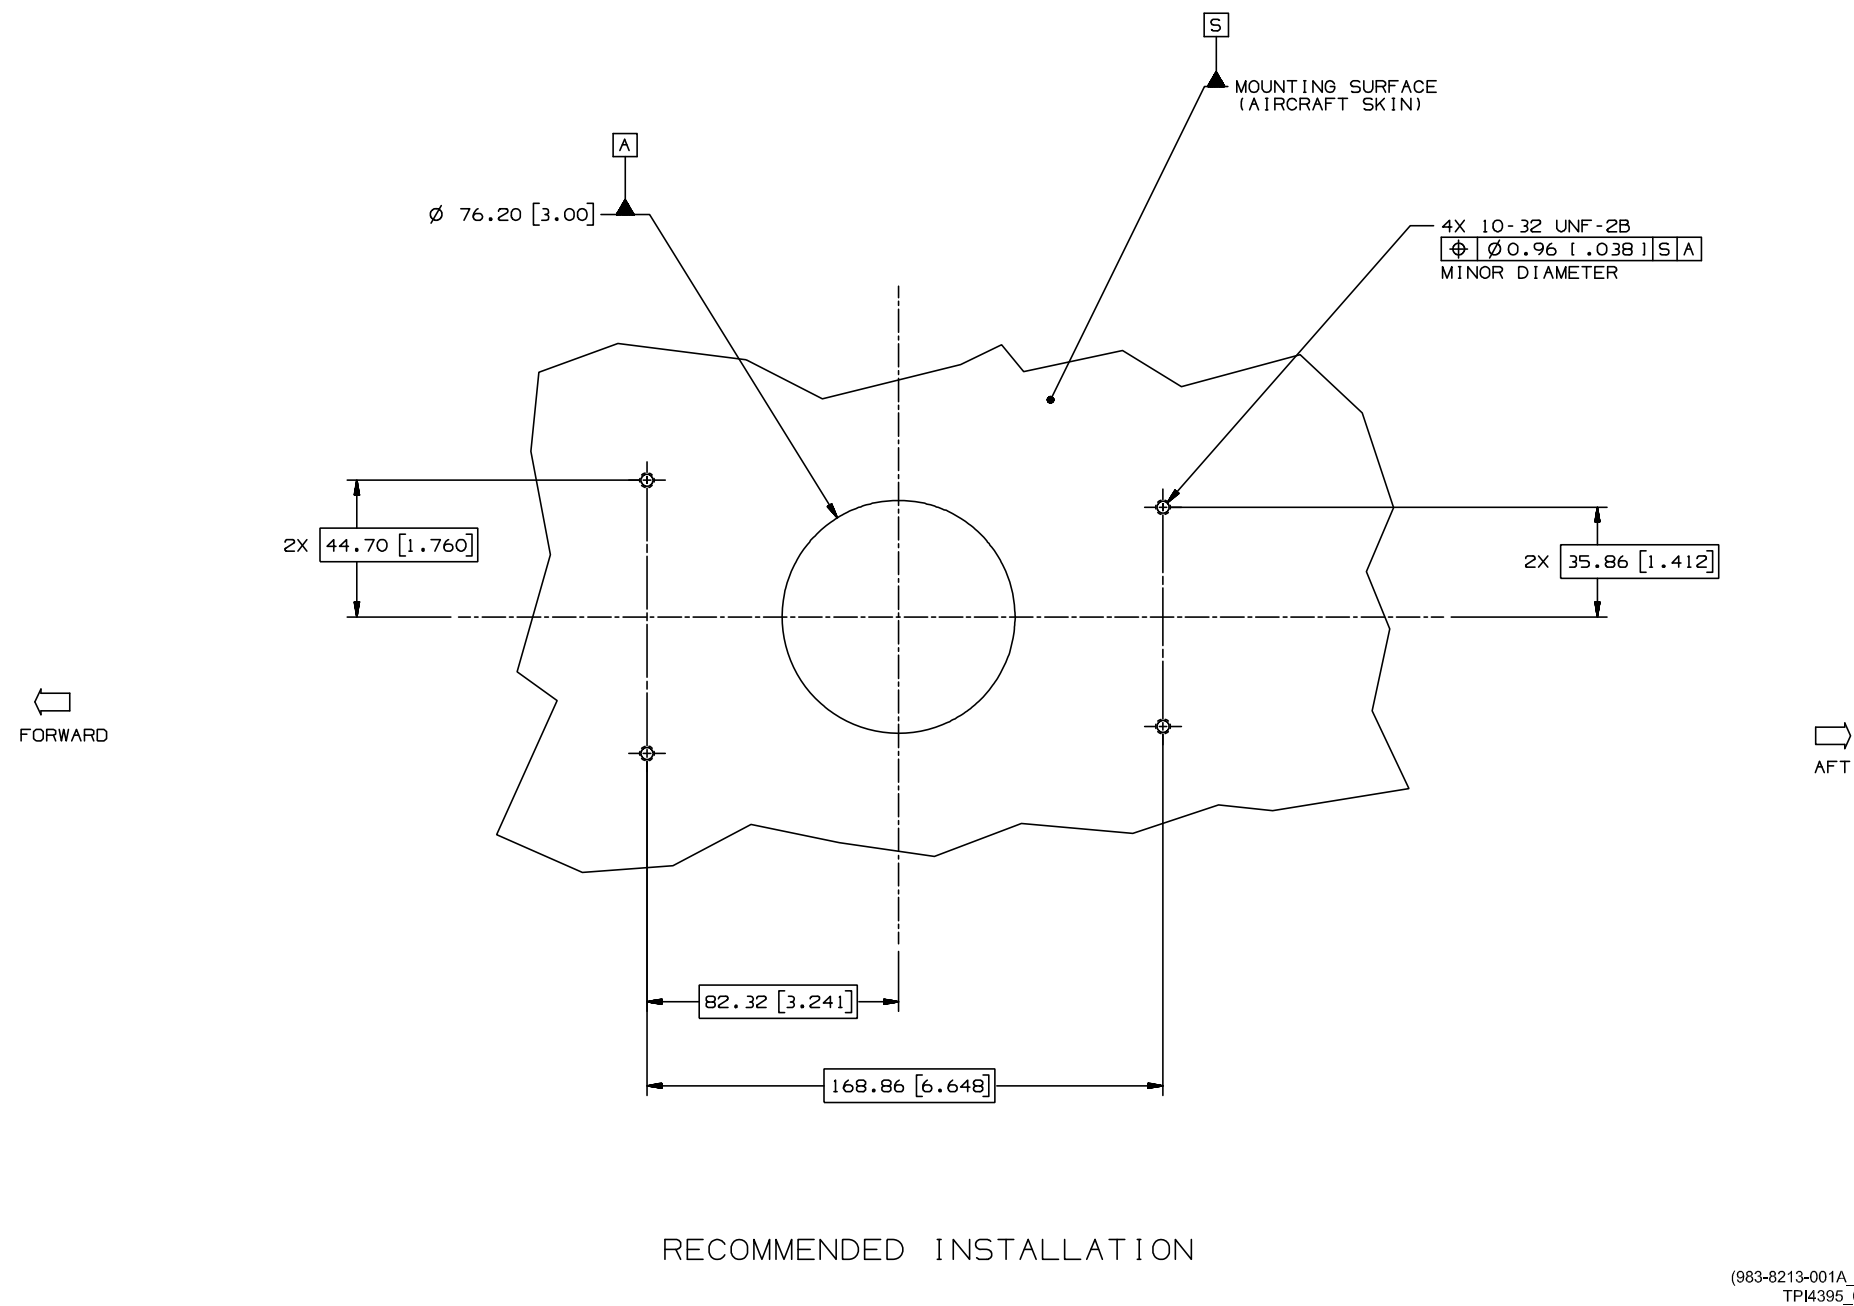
TSA-4100 Outline and Mounting Diagram, Short Connector Version (Sheet 2 of 2)
